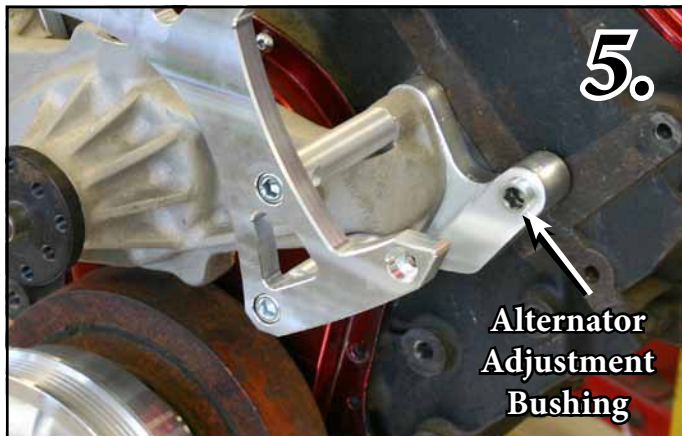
Install $\frac{5}{8}$ "-18 Threaded Alternator Adjustment Bushing (S452) into Rear Alternator Support Bracket as shown.
